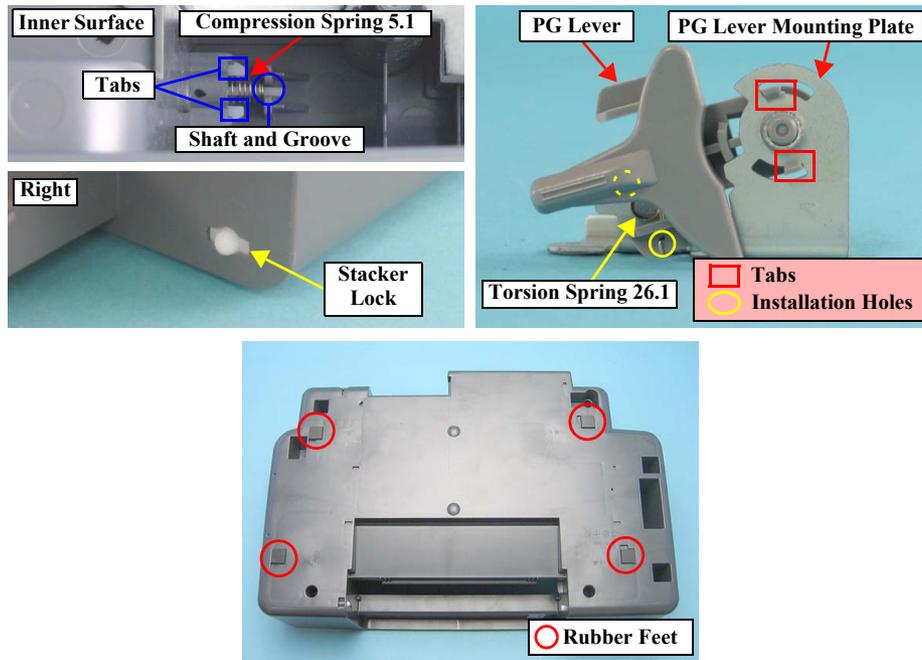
Removing Stacker Lock/PG Lever/Rubber Feet
